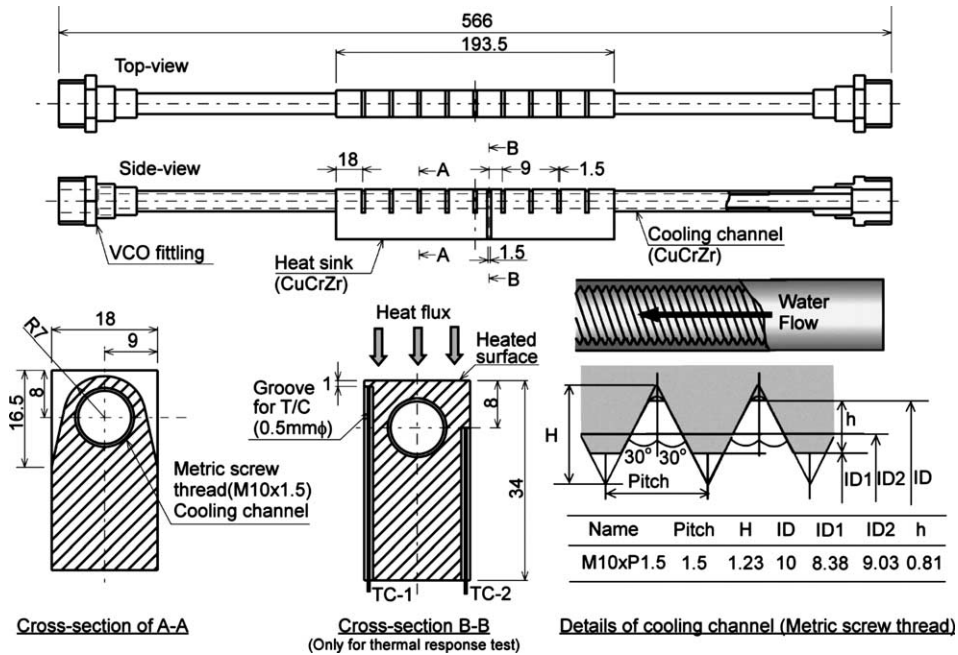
Schematic drawing of a screw tube test sample for thermal fatigue tests.
